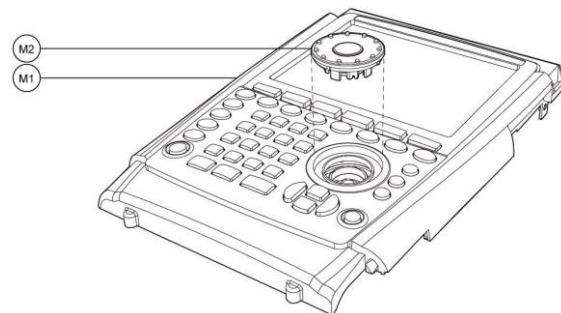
Remove Front Rotary out of the Subassy Case Front
